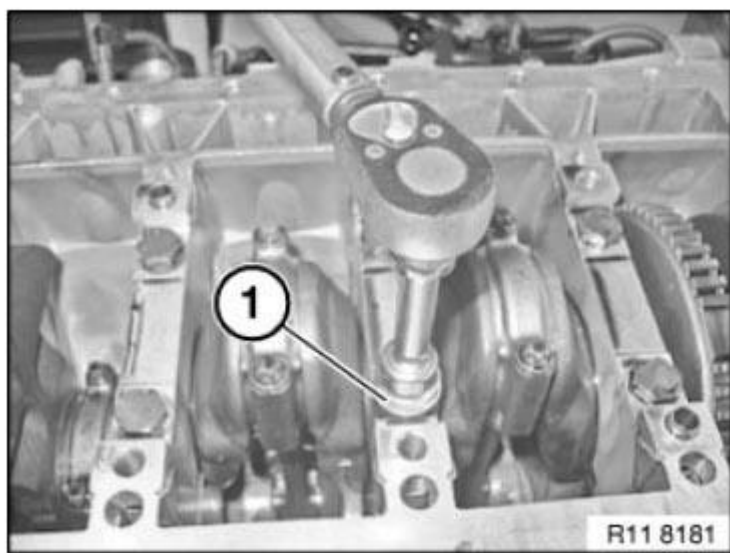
Positioning Crankcase Lower Section On Crankcase Upper Section
